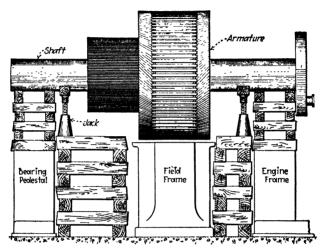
Letting armature and shaft down into its position in the bearings.
